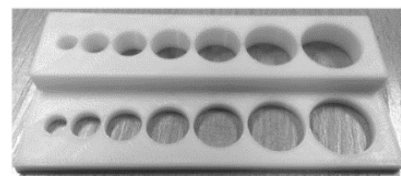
Example of defect cards given to the panel B student, on the dimensional parts error.
